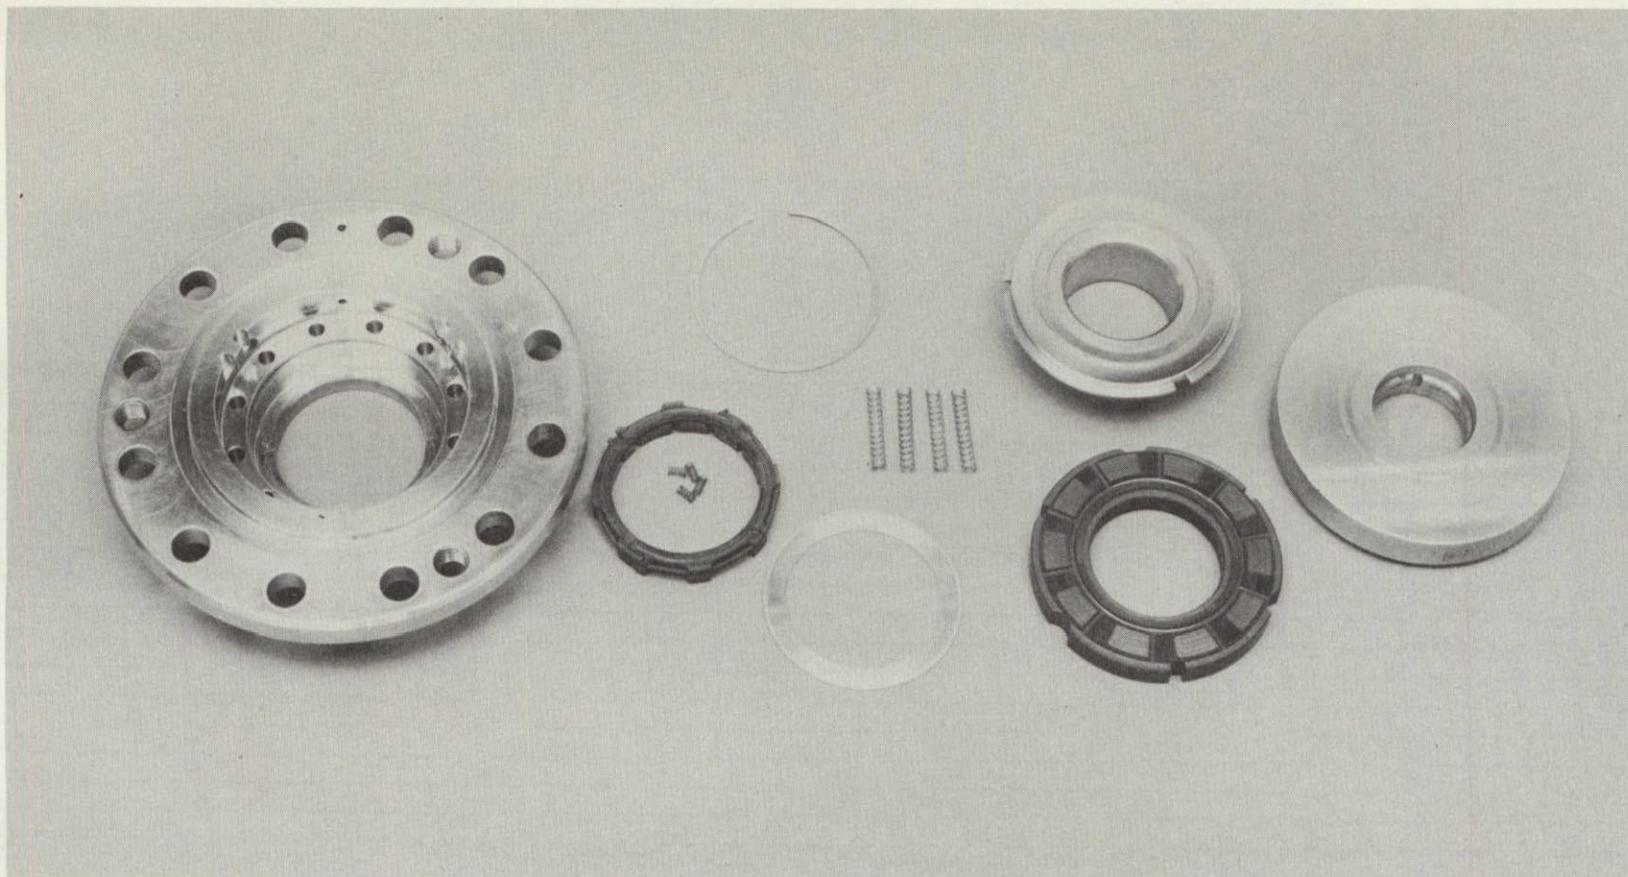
Rayleigh Step Piston Ring LOX Seal Assembly
